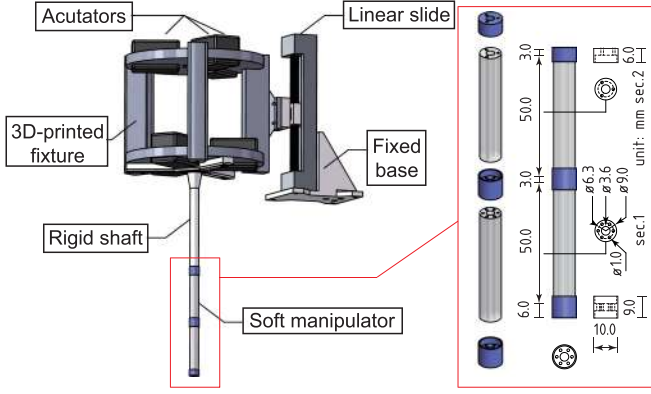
Layout of the soft continuum robot and prototype assembly.
